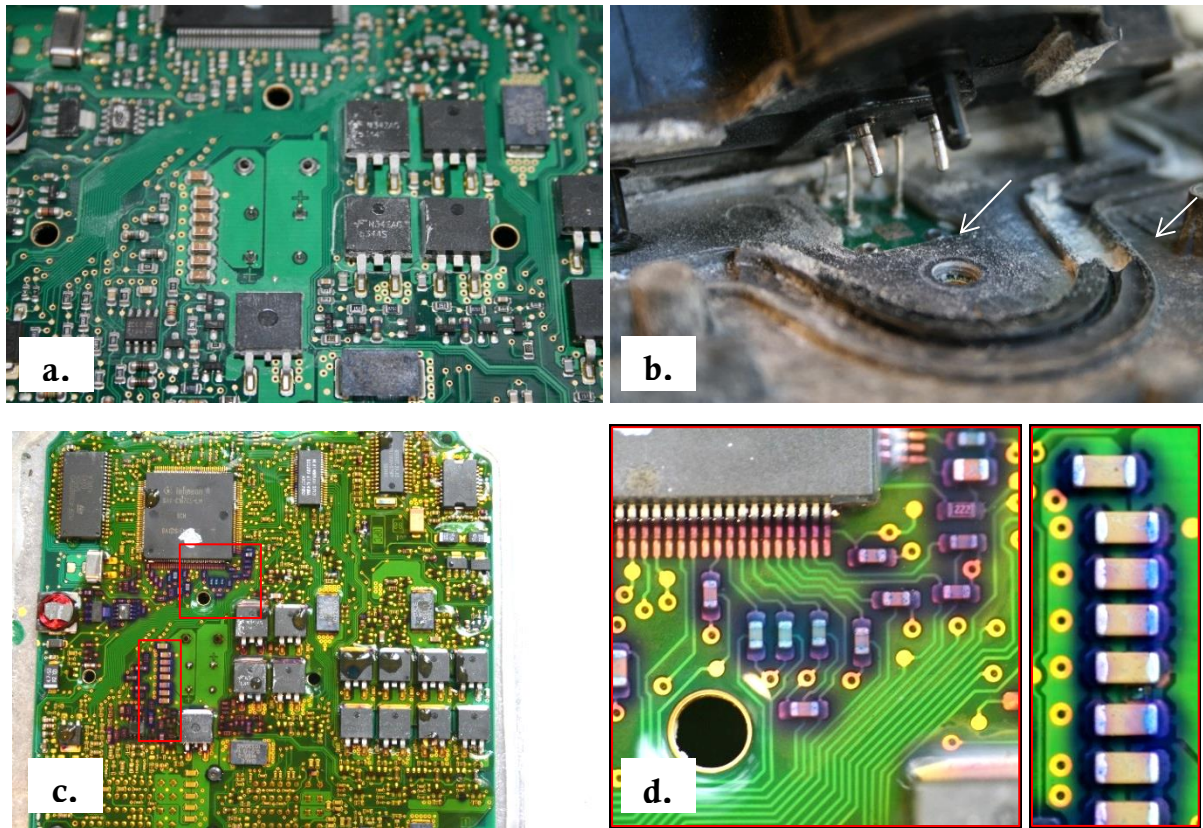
a. Visual inspection of the failed PCBA (top side) b. failed gasket and corrosion of aluminium enclosure served as entry point for humidity (bottom side), c. corrosion profile of the failed PCBA (top side), and d. close-up view of some of the components showing corrosion
